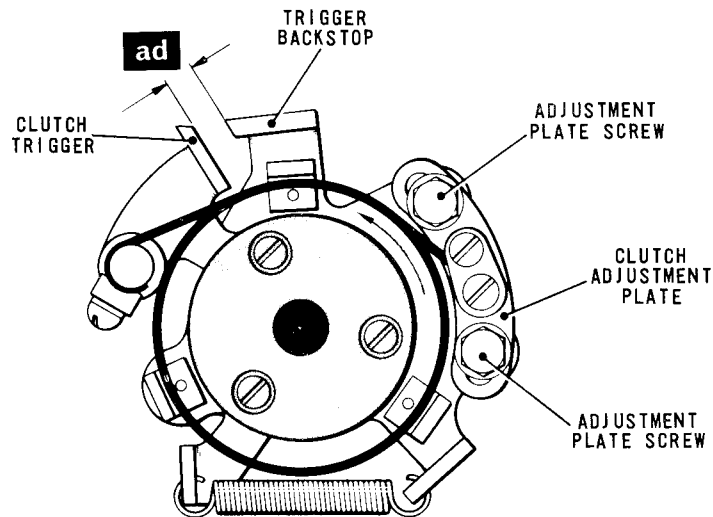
TRANSLATOR CLUTCH—REAR VIEW
